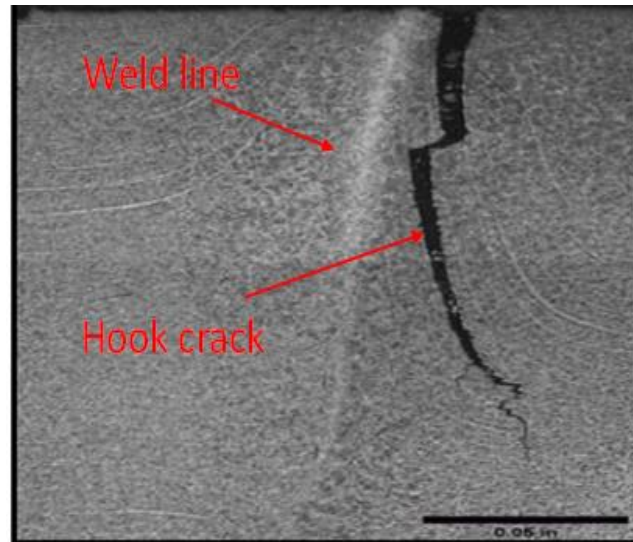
Hook Crack in an OCTG. Crack observed adjacent to the weld line and formed during the welding process [7].
